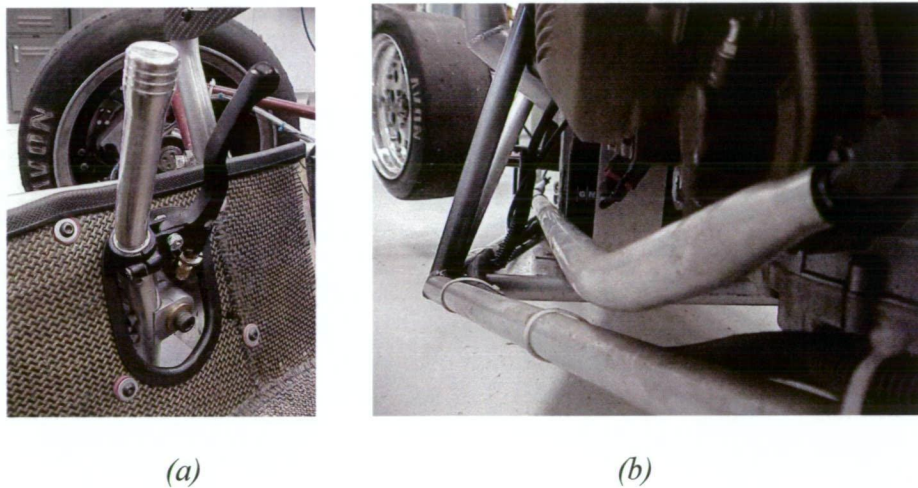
Gear shifter, (a) lever and clutch & (b) linkage to the gearbox
